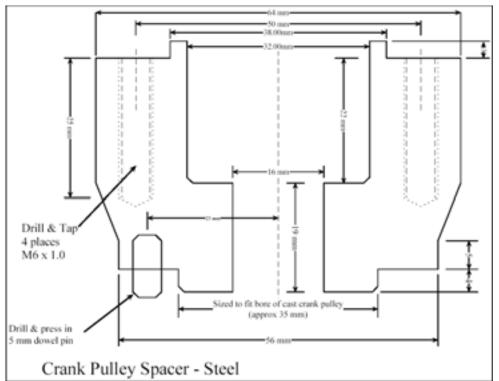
Pulley Spacer CAD Drawing (prior to minor design modifications)
